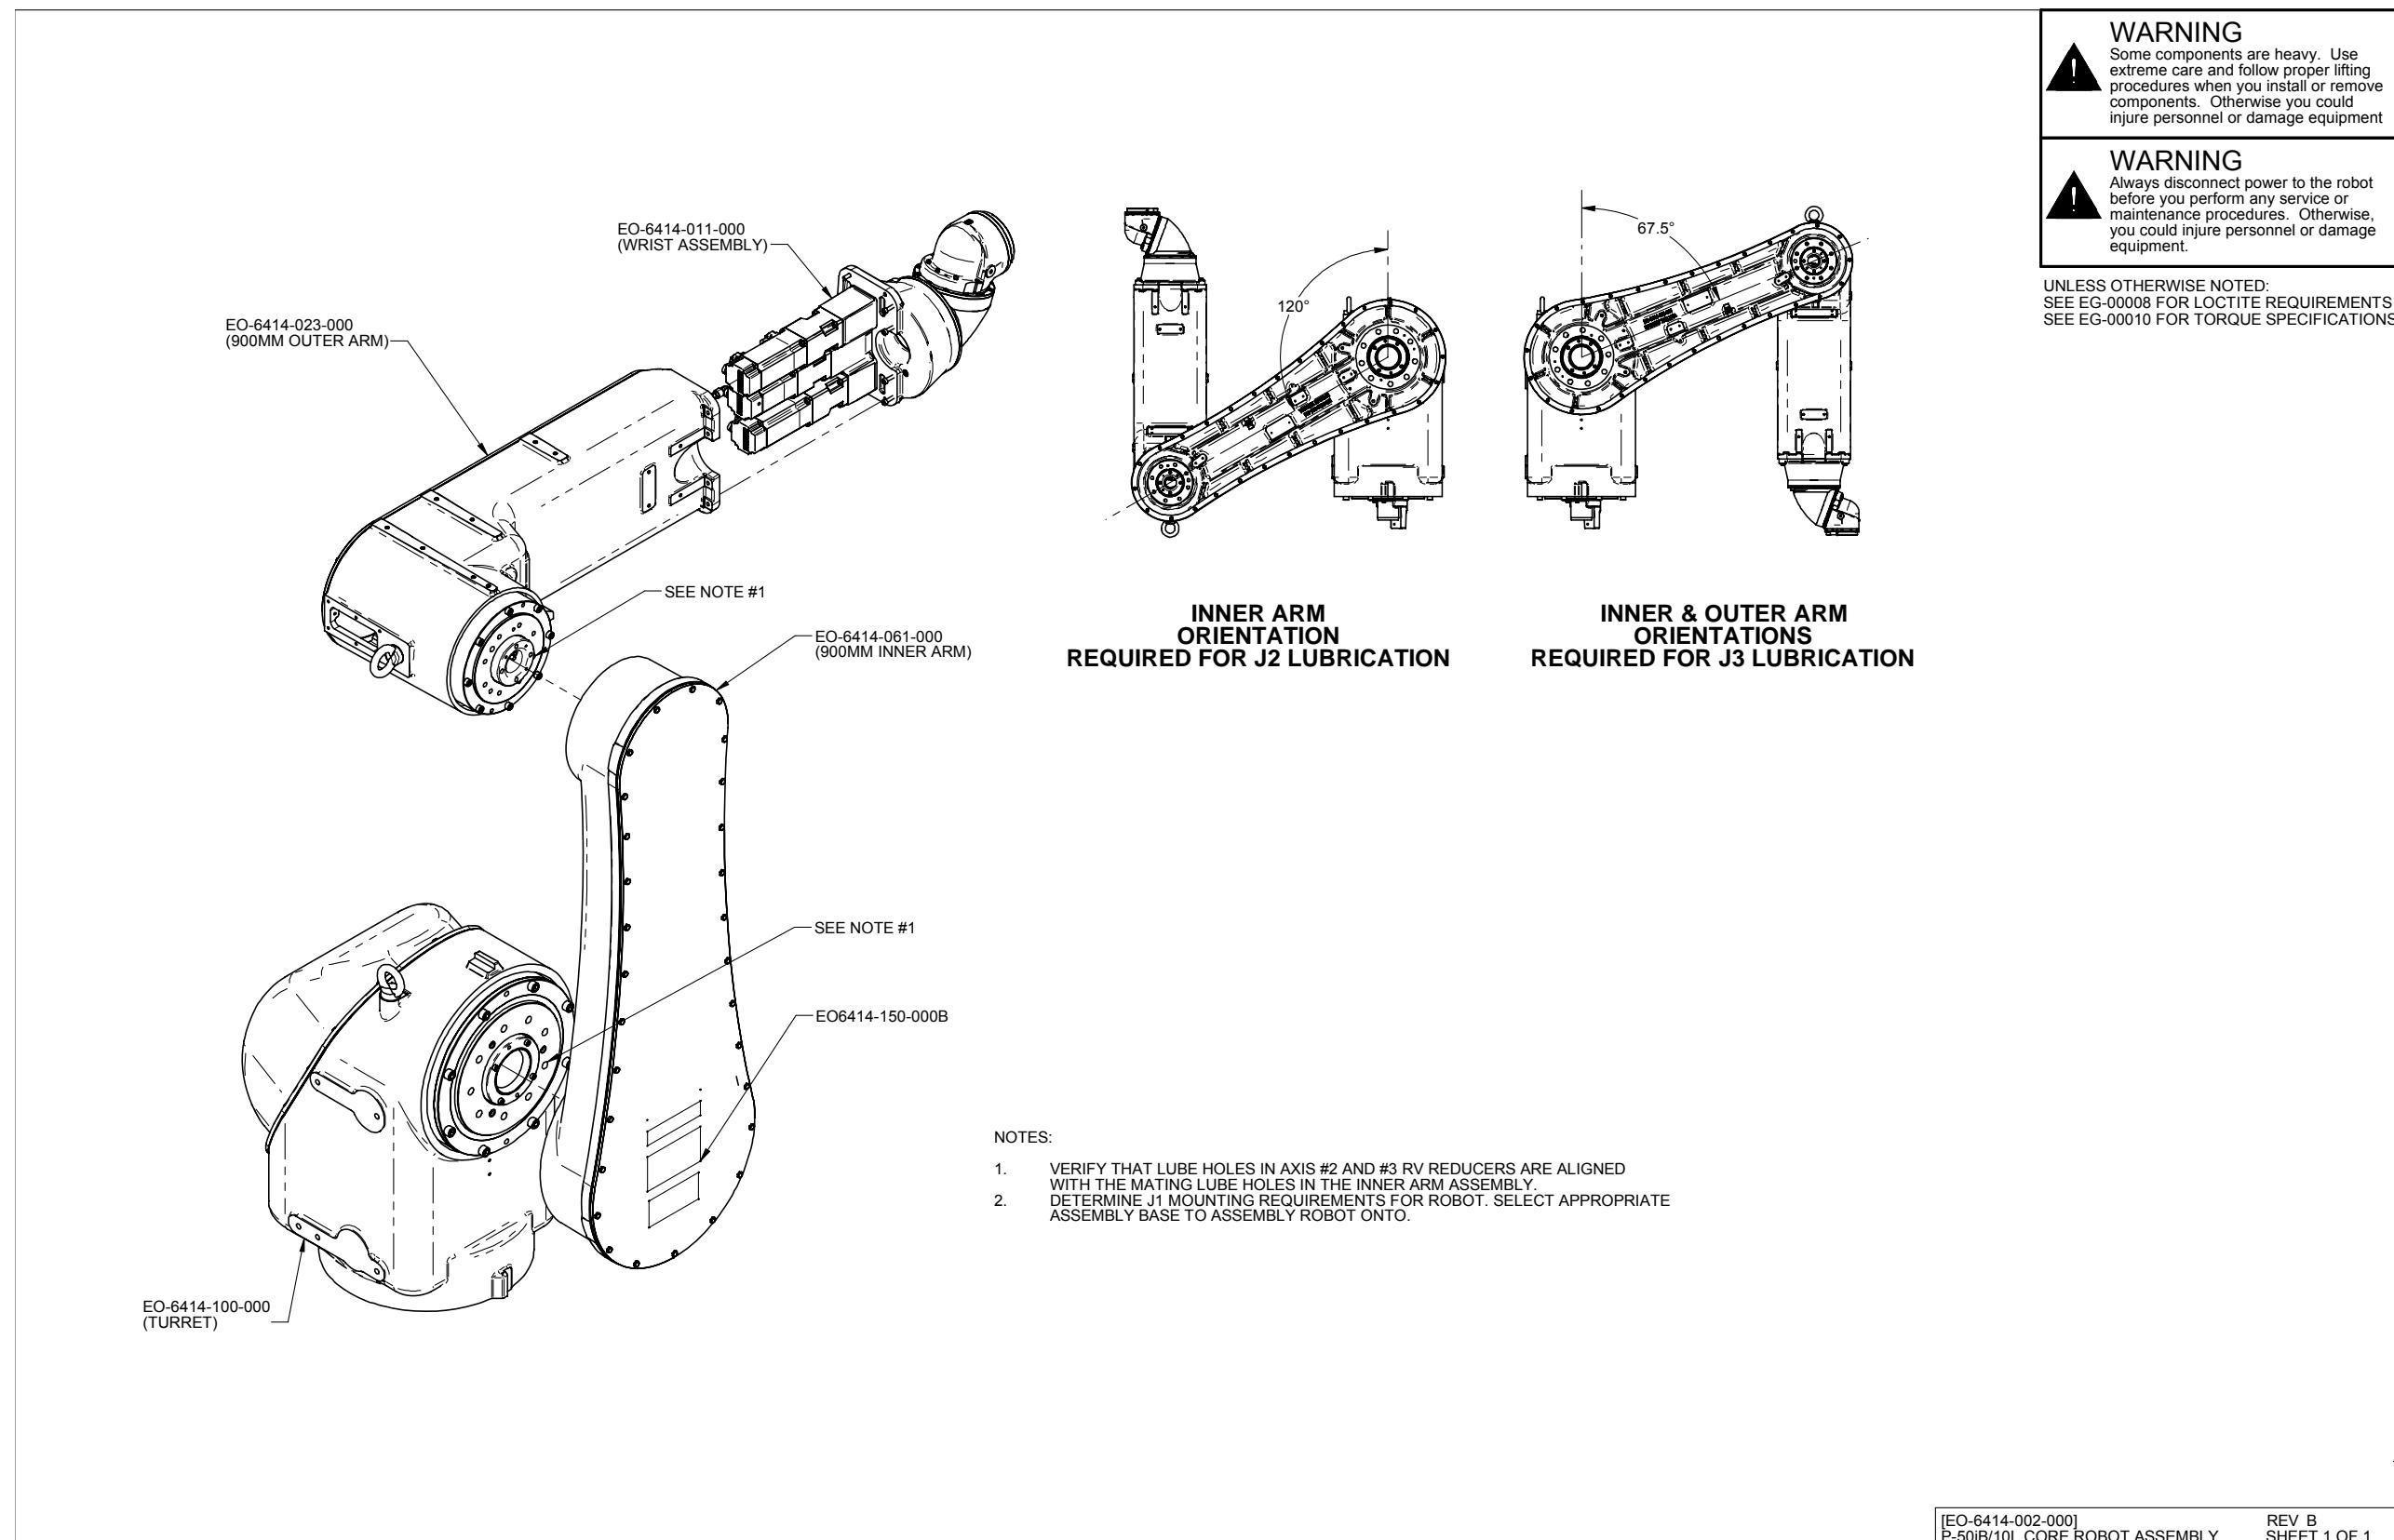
EO-6414-001-000, P50iB/15 CORE ROBOT ASSEMBLY
